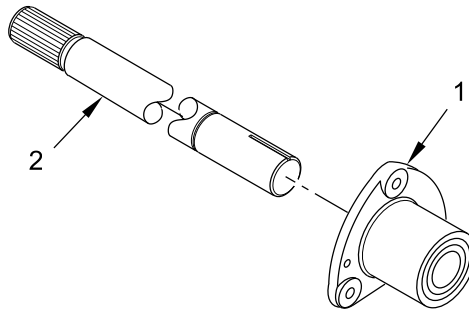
Fan Drive Shaft and Bearing Housing – Disassembly.
